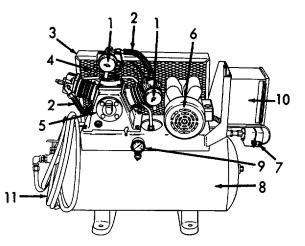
Compressor Unit, Reciprocating, 5 CFM, 175 PSI, Electric Motor Driven.
